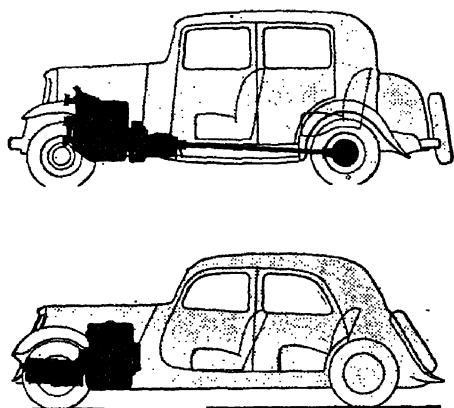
Showing (top) Ordinary Rear Drive Car and (bottom) Front Drive Car.
